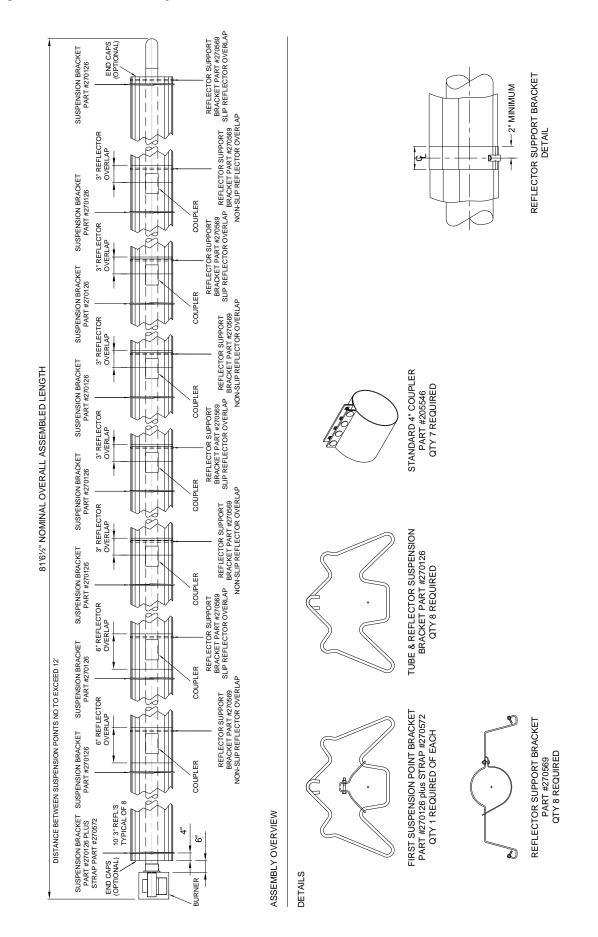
Heater Assembly: Model U tube 60-U20 and 80-U20
